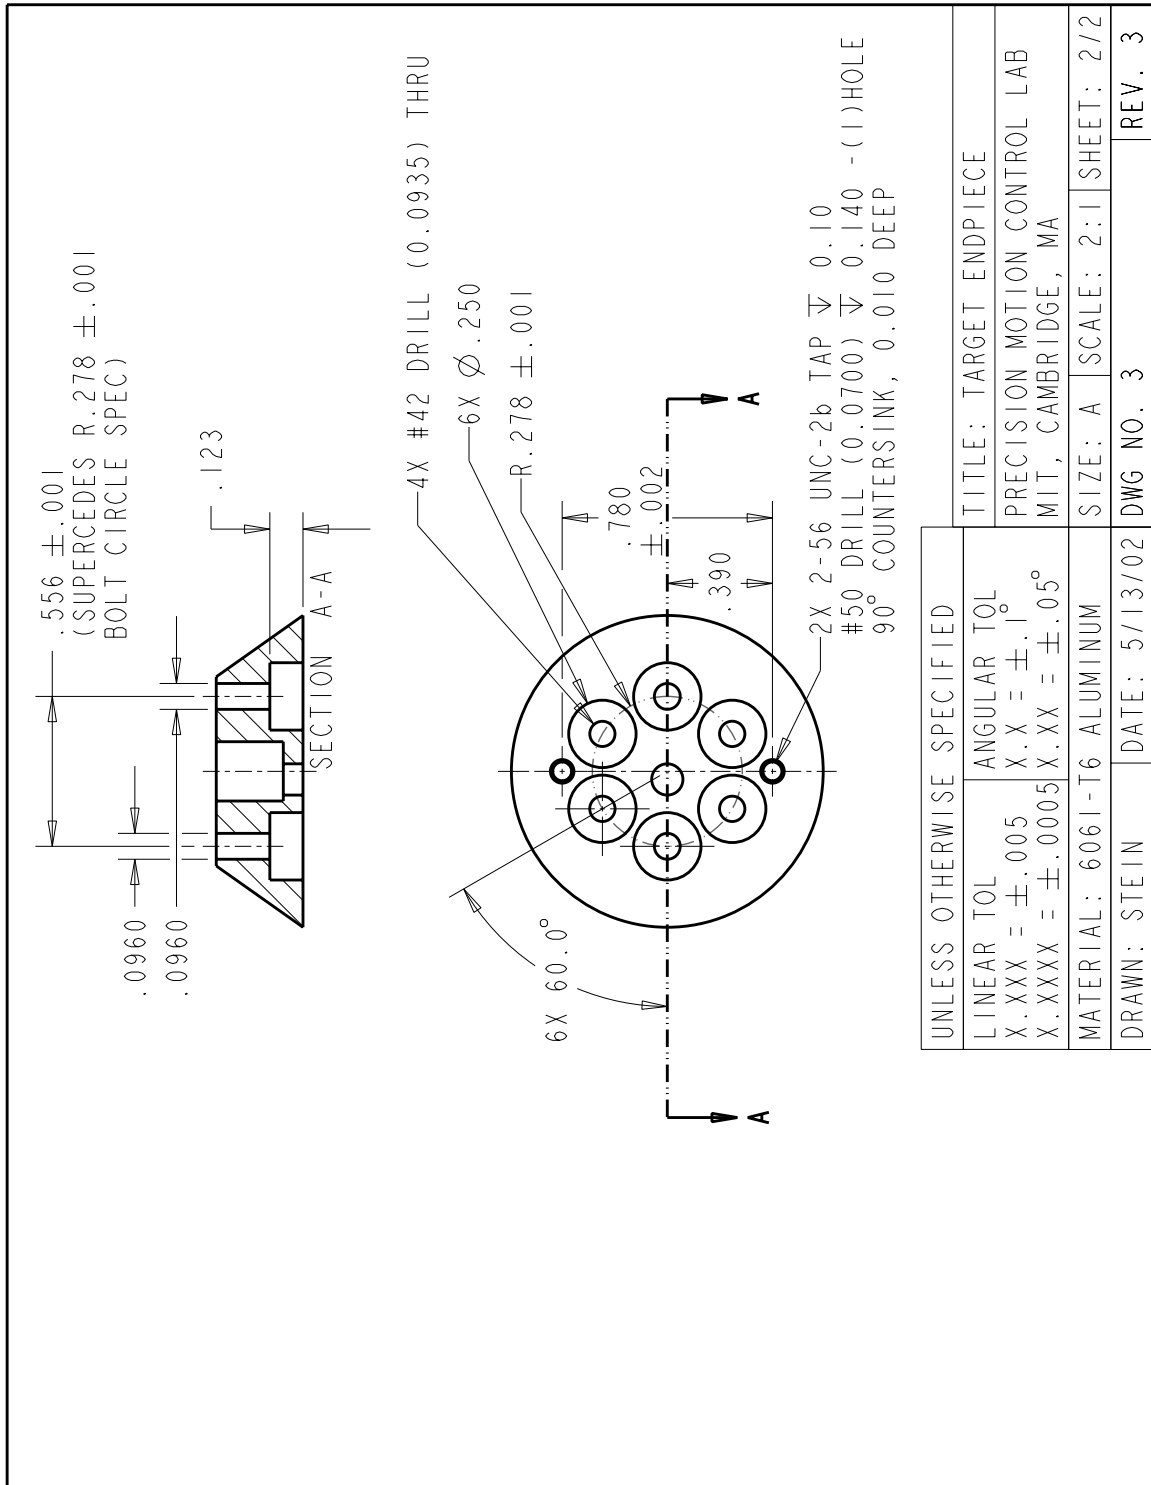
Target endpiece mechanical drawing, sheet 2.
